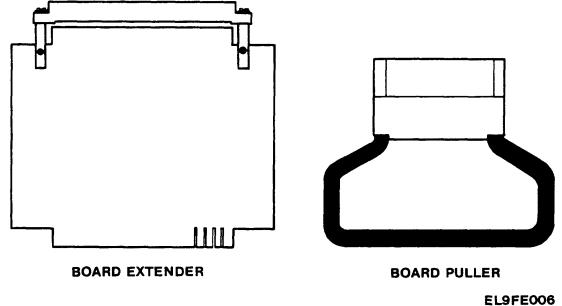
Board Extender and Board Puller Used with the ME-526A/USM.
